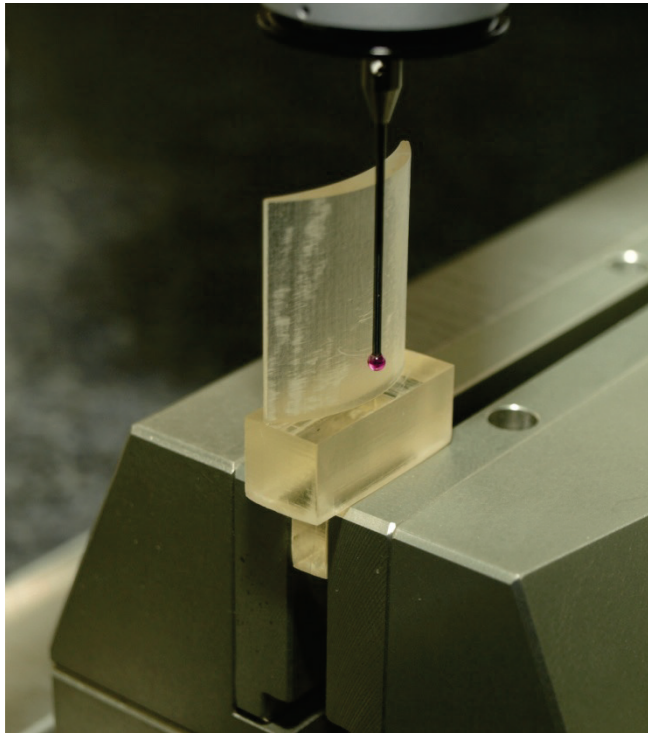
Measurement of the rotor machine blade model made using the SLA method with the use of a coordinate measuring machine
